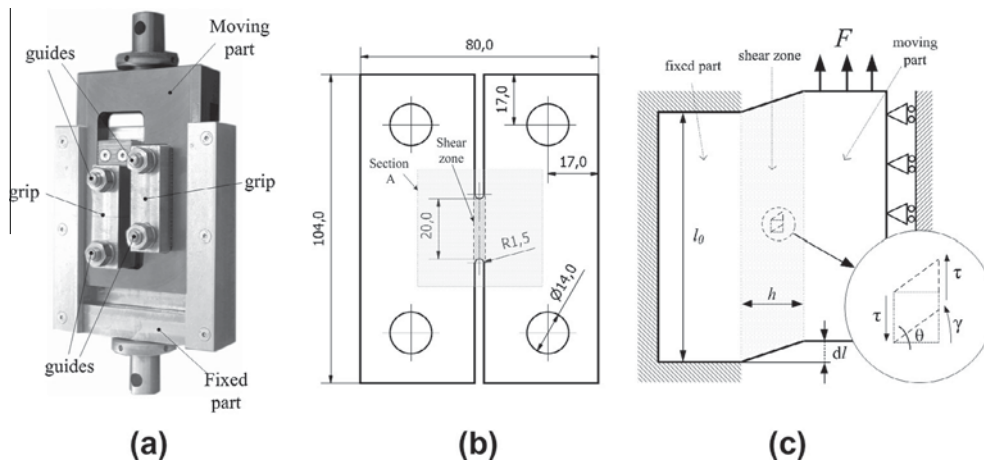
Shear testing tool (a), shear testing sample geometry (b) and scheme of the shear zone deformation under simple shear (c).
